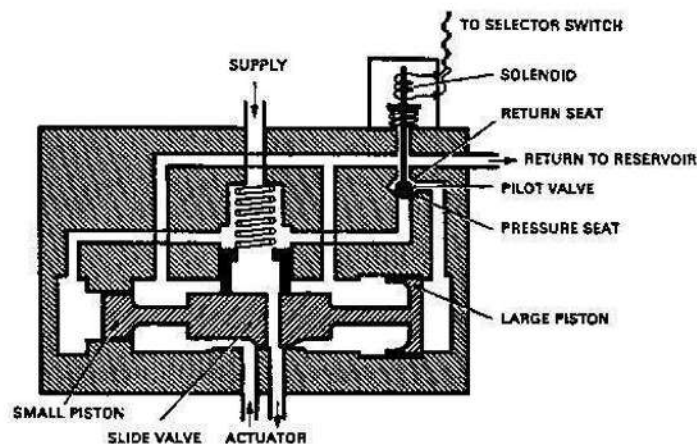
Electrically operated, Slide-valve, Selector (Single Solenoid)
